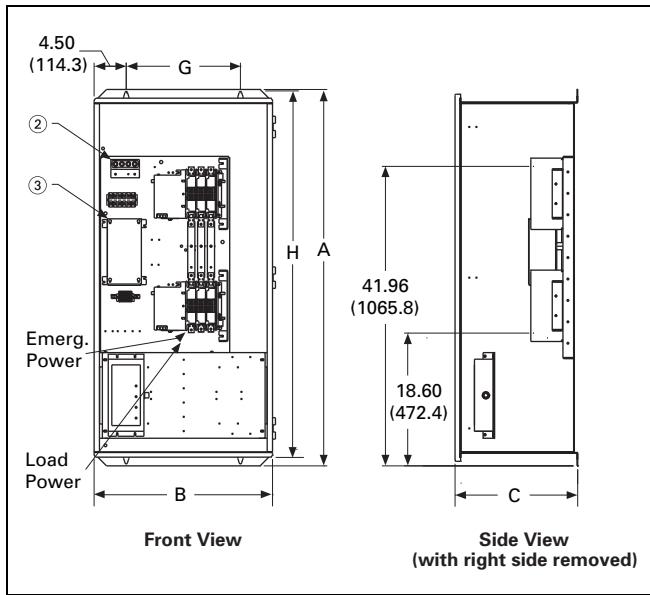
Automatic Up to 400 A Wallmount NEMA 1
